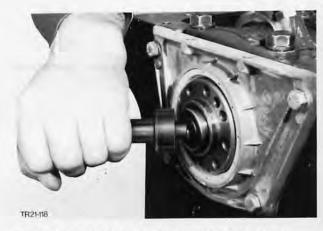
Fit crankshaft needle bearing using Special Tool 21–045
